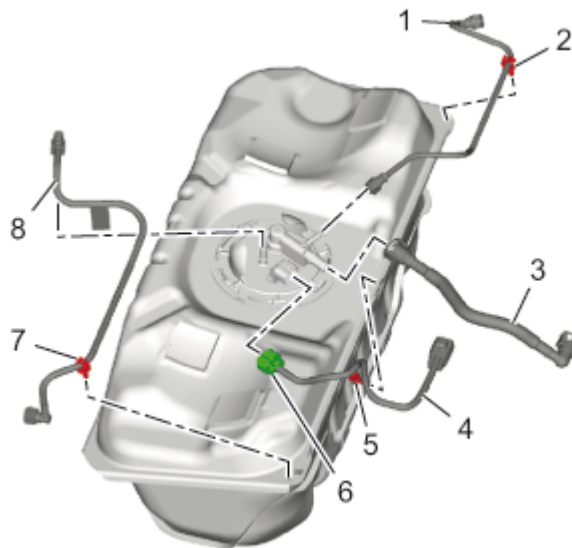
Fuel Pump Feed Hose, Evaporative Emission Canister Hose, Evaporative Emission Rear Hose, Electrical Connector, Fuel Pump Module Wiring Harness And Retainers
